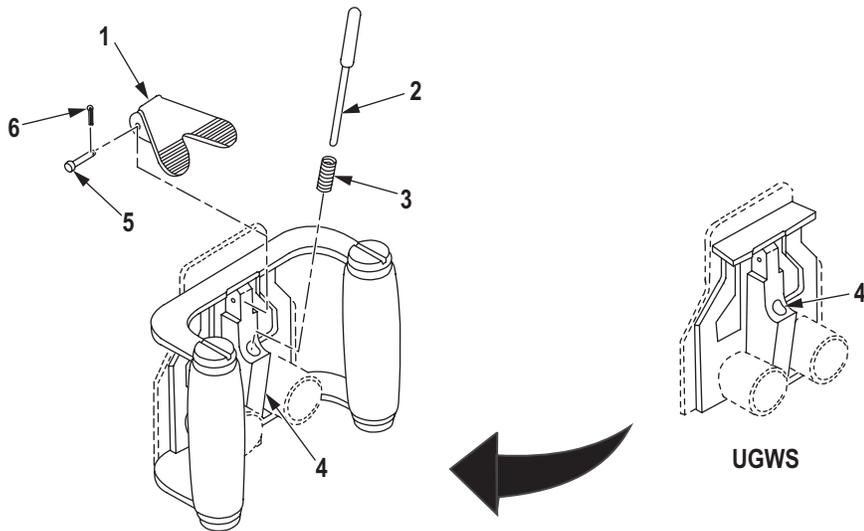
Bolt, Backplate, and Control Grip Assembly Installation.
